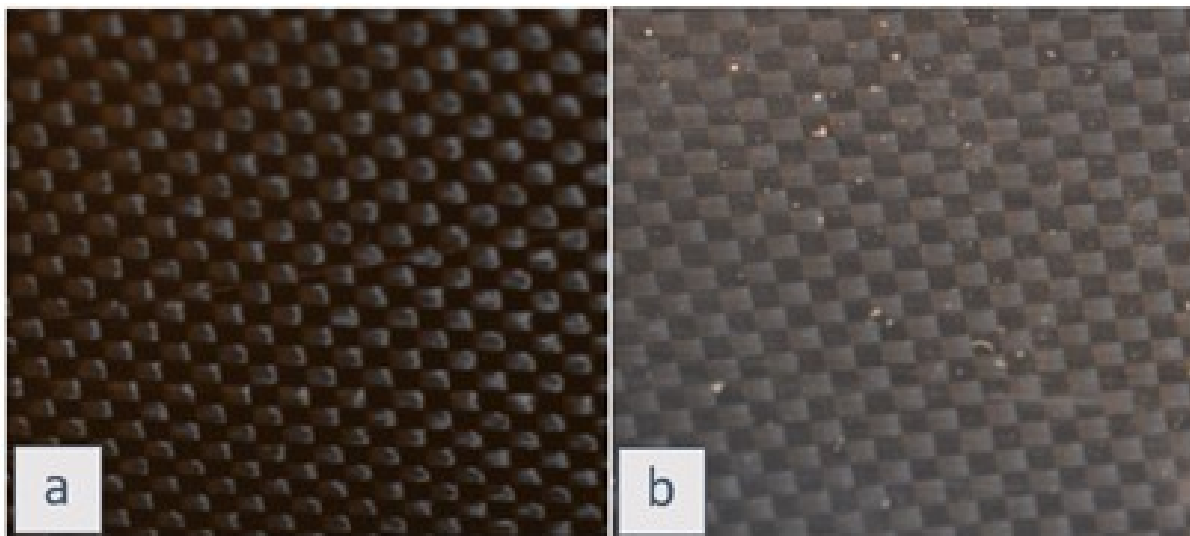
These images show the internal surface of the composites created by the washout tooling (a) and the hollow 3D printed tooling (b).
